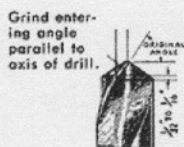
Reducing entering angle of the lips for cutting soft material.
